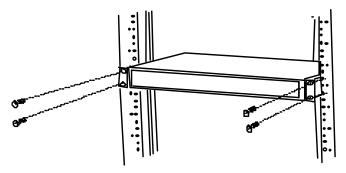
Attaching MultiVOIP to Rack Rail (MVP2410/3010 or MVP410/810)
